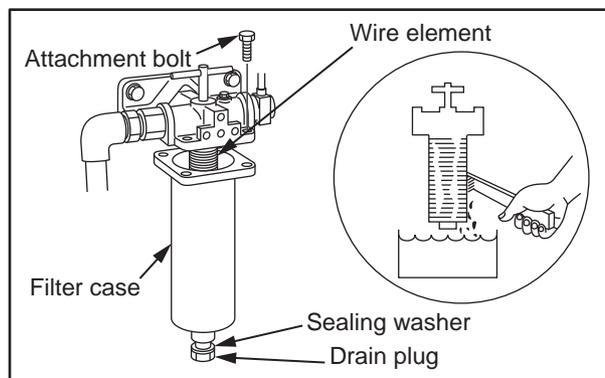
Inside of fuel filters (wire-element type) - Clean
